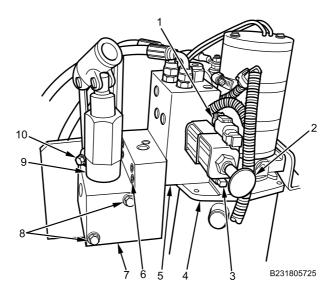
Hydraulic Power Unit Manifold and Module Installation.
